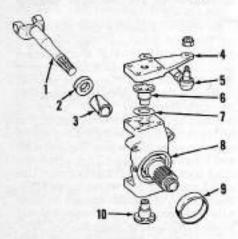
Exploded view of David Brown front drive stub axle showing component parts and their relative positions.
